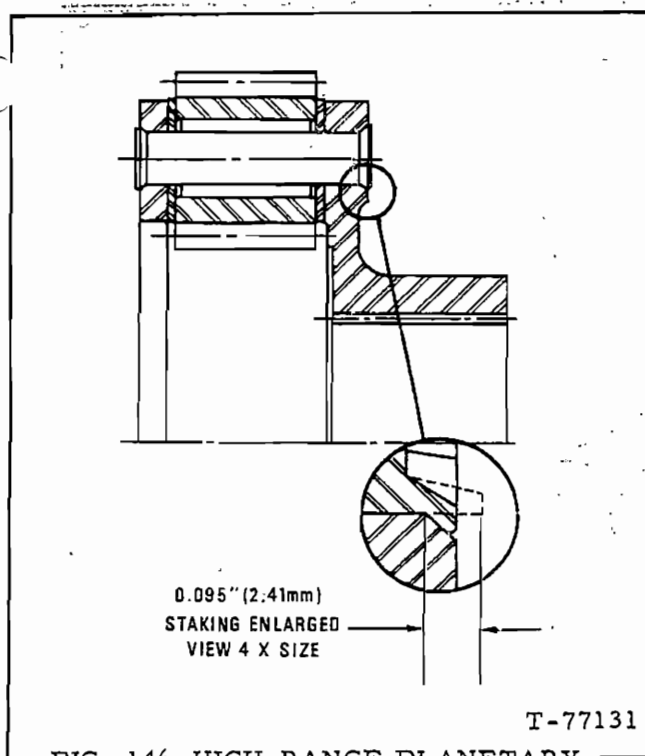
HIGH-RANGE PLANETARY CARRIER ASSEMBLY, SHOWING SPINDLE INSTALLATION DIMENSION - CROSS SECTION
